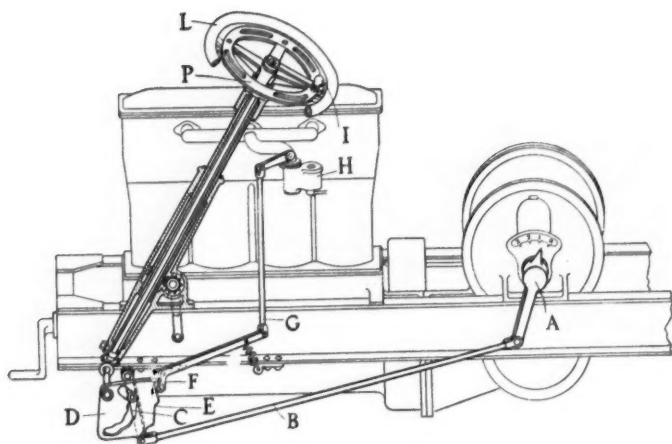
Diagram showing inter-connection of hydraulic gearset control and throttle
